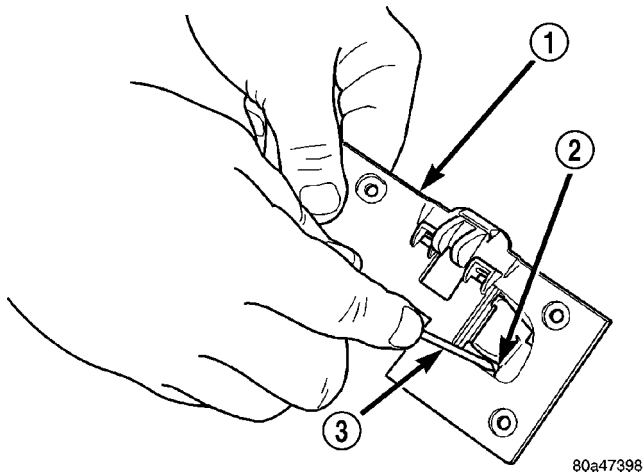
GLOVE BOX LOCK CYLINDER REMOVE/ INSTALL
